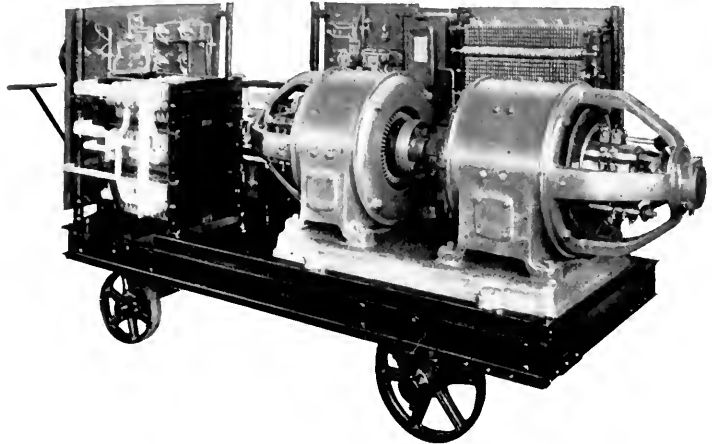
Another View of the Welding Equipment shown in Fig. 24
